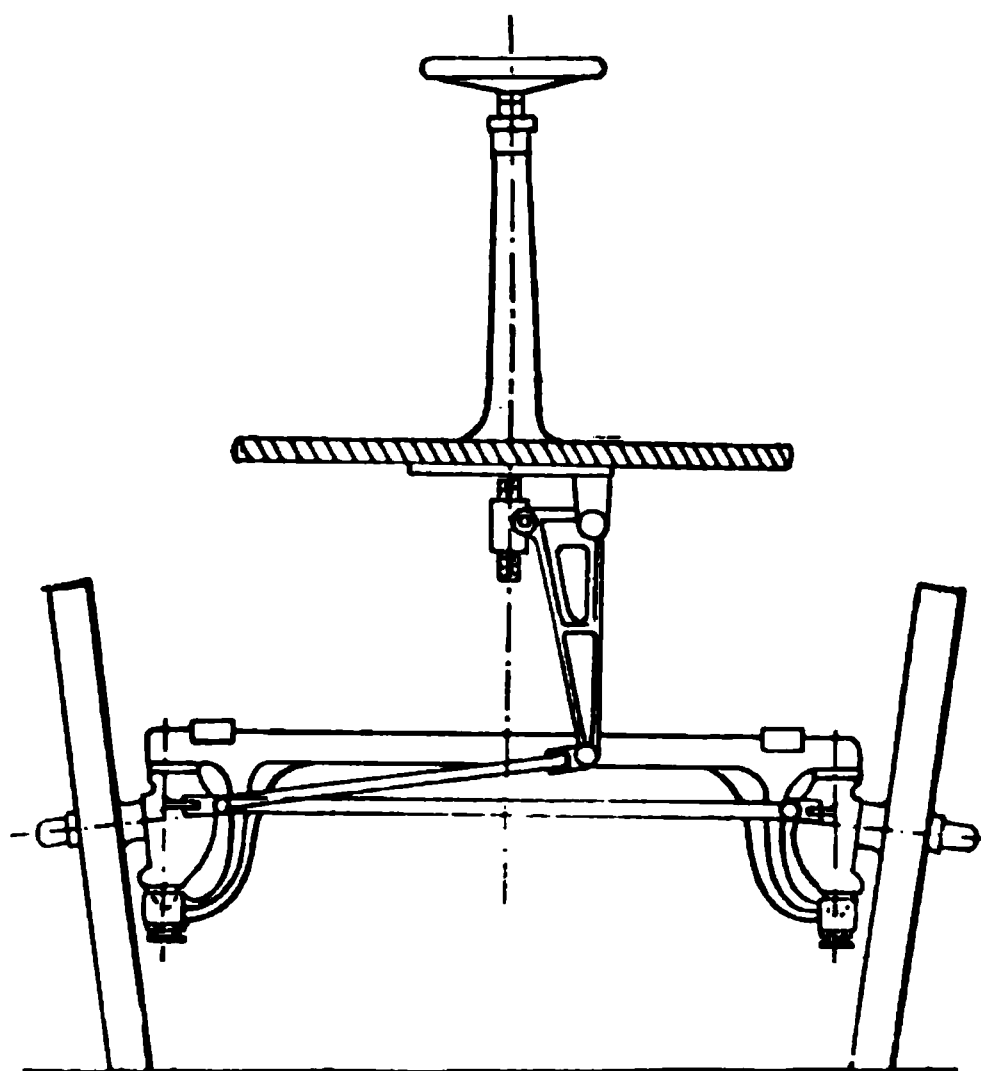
Steering Arrangement of the Clarkson-Capel Steam Wagon. The spindle of the steering wheel carries a screw at its end, which works a boss, as the wheel is turned, thus actuating the lever and drag-link attached to the arm of one of the axle pivots.
